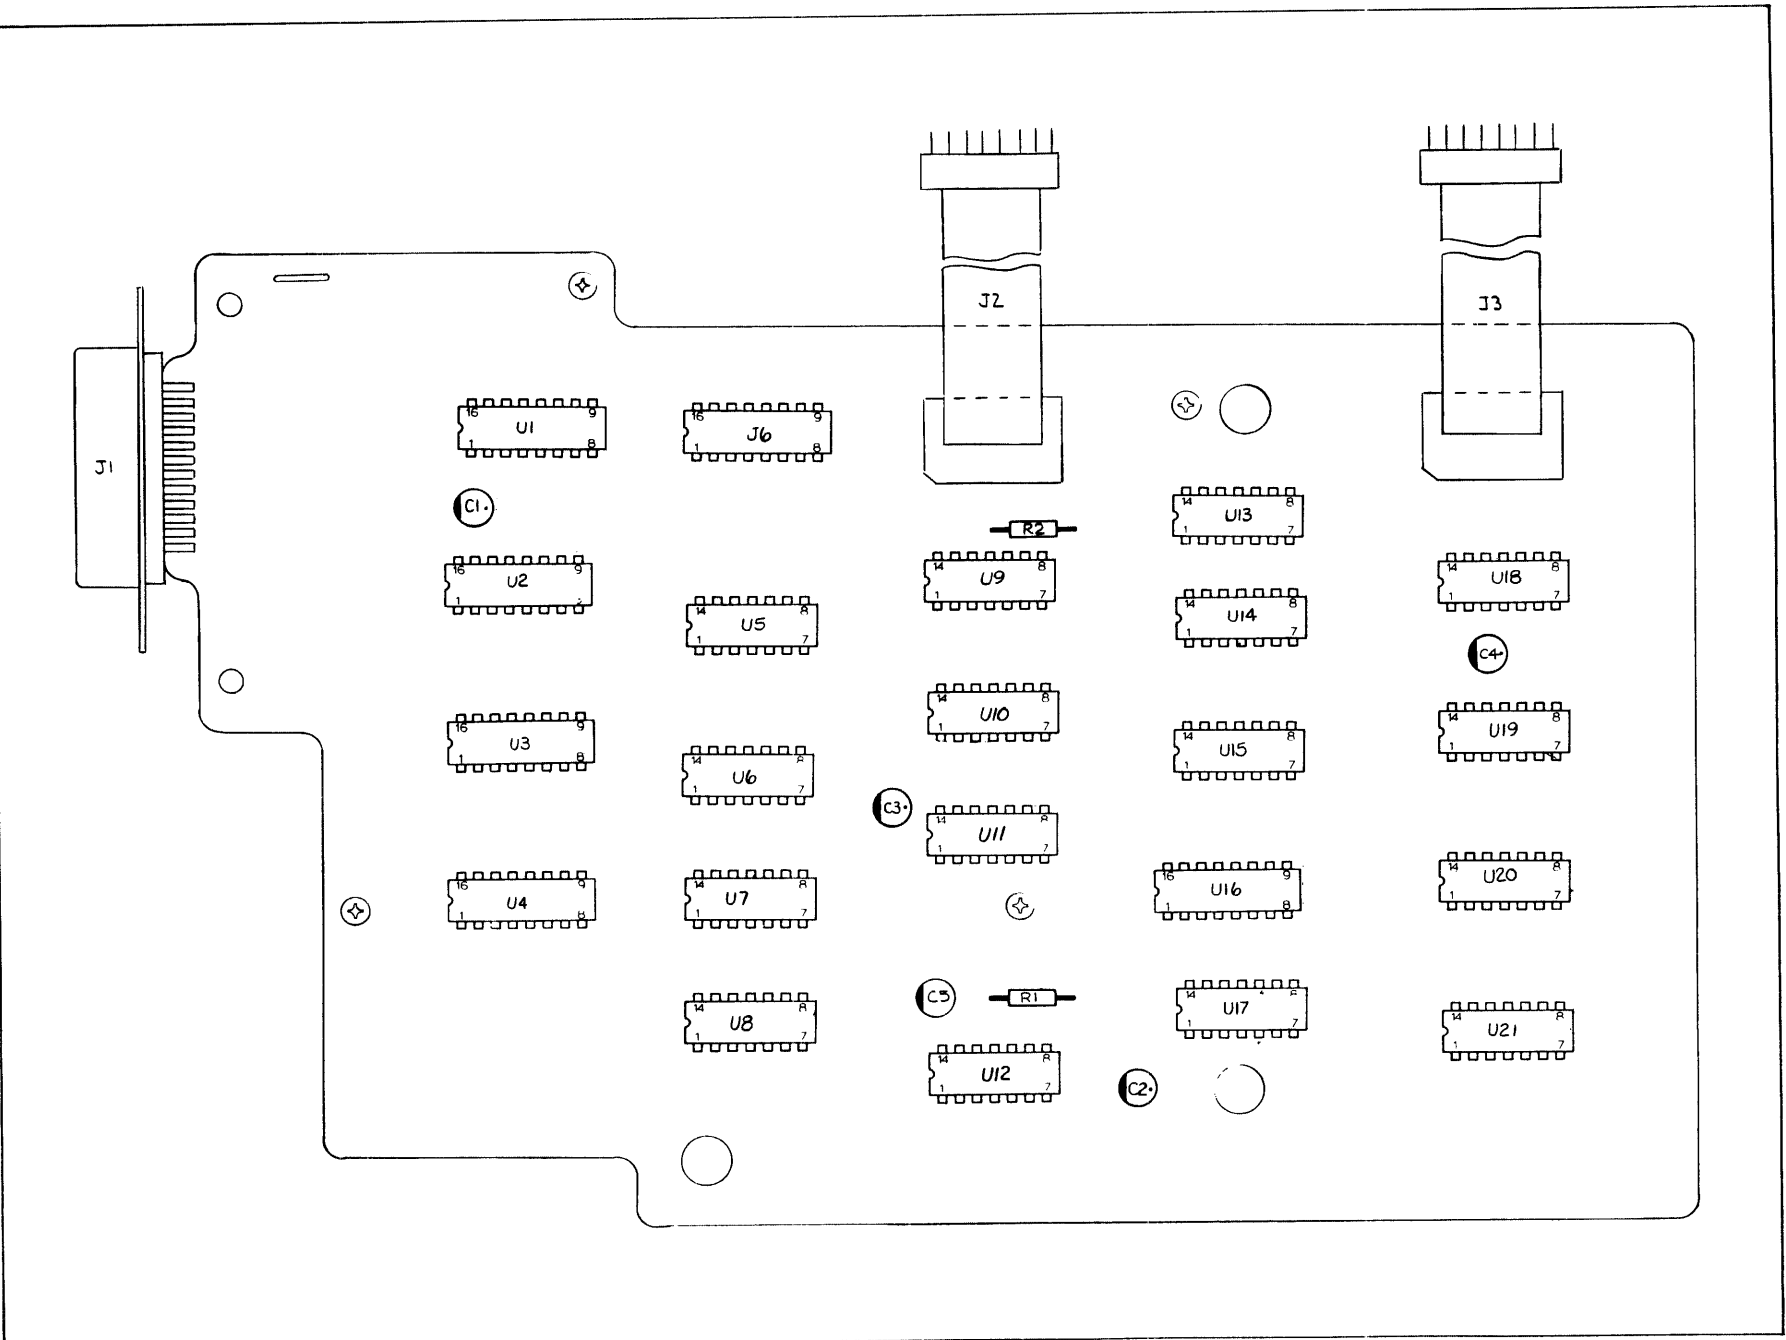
A16 IEEE-488-1975 Bus Interface PCB Assembly
